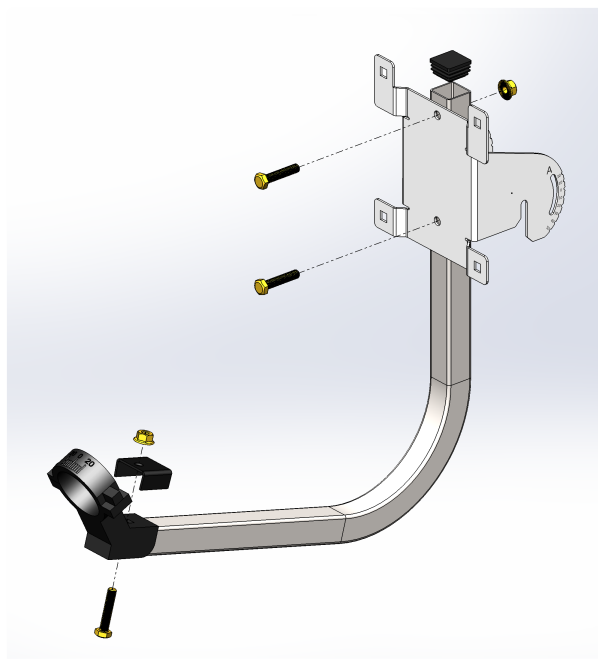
Fastening the holder and the movable part of the bracket on the arc
